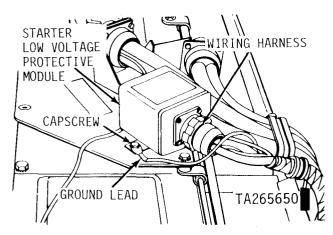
124.1. Removing or installing starter low voltage protective module – late engines.
